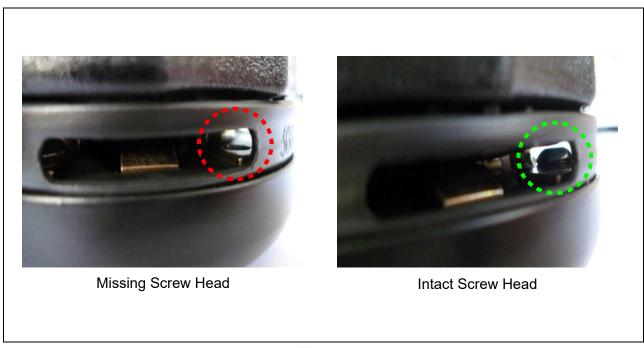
PNR 1111475 Series Rotary Buckle Screw Head
